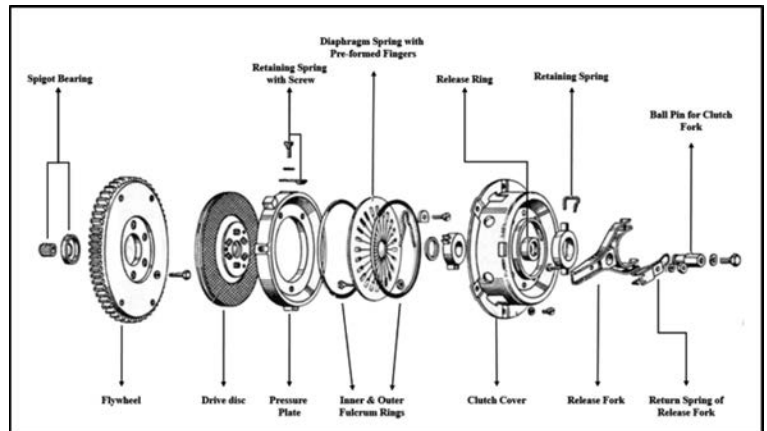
The multi-plate clutch developed by Chevrolet, the coil springs were replaced by a diaphragm spring.
